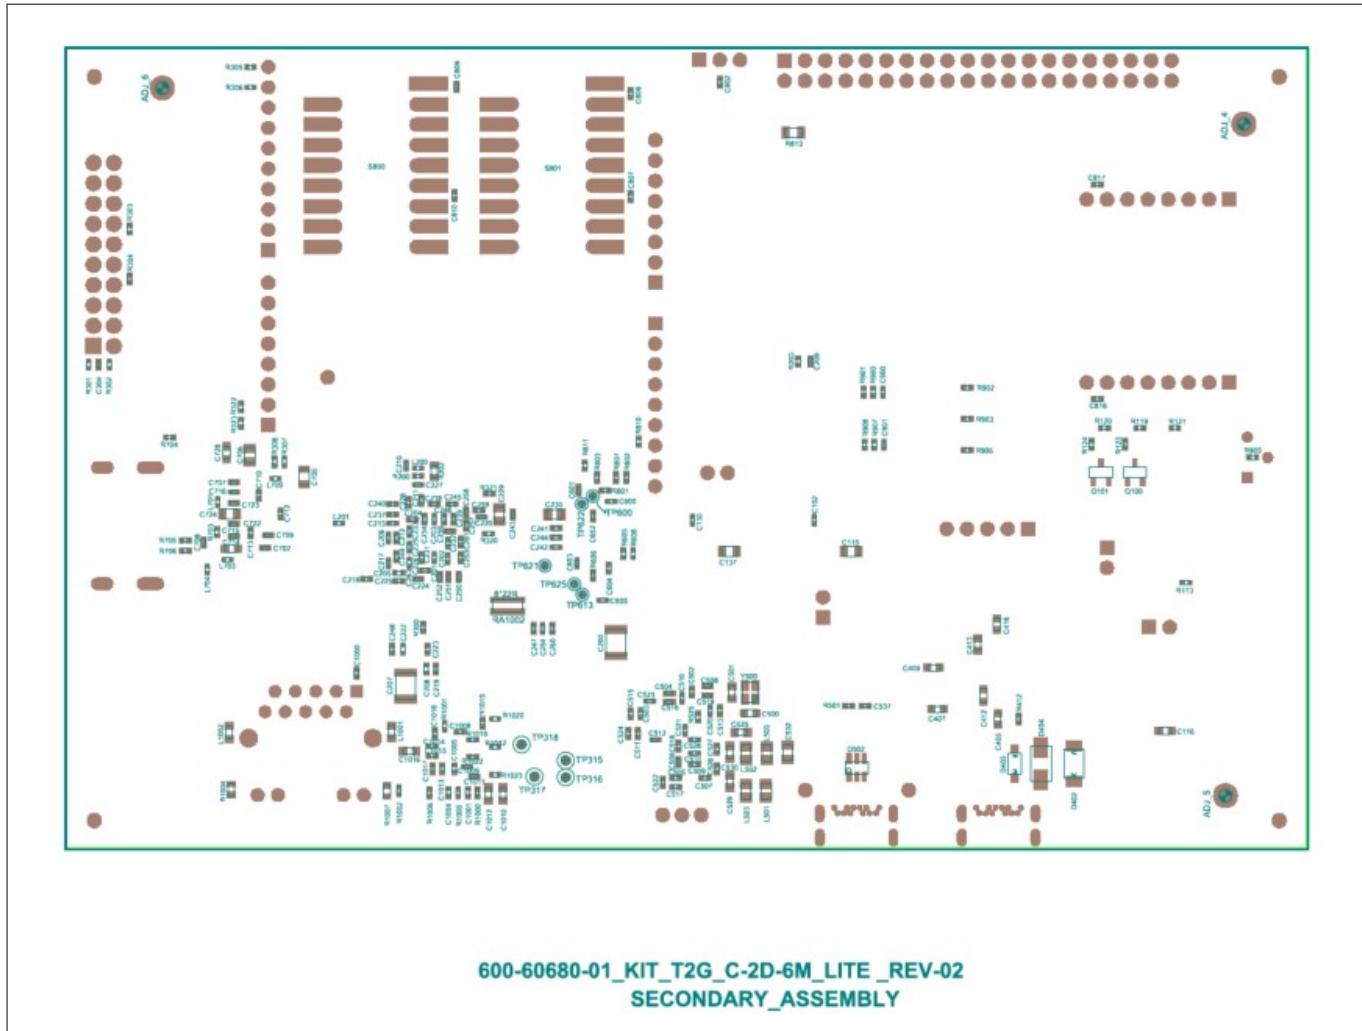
Secondary assembly drawing of the Cluster 6M Lite Kit
